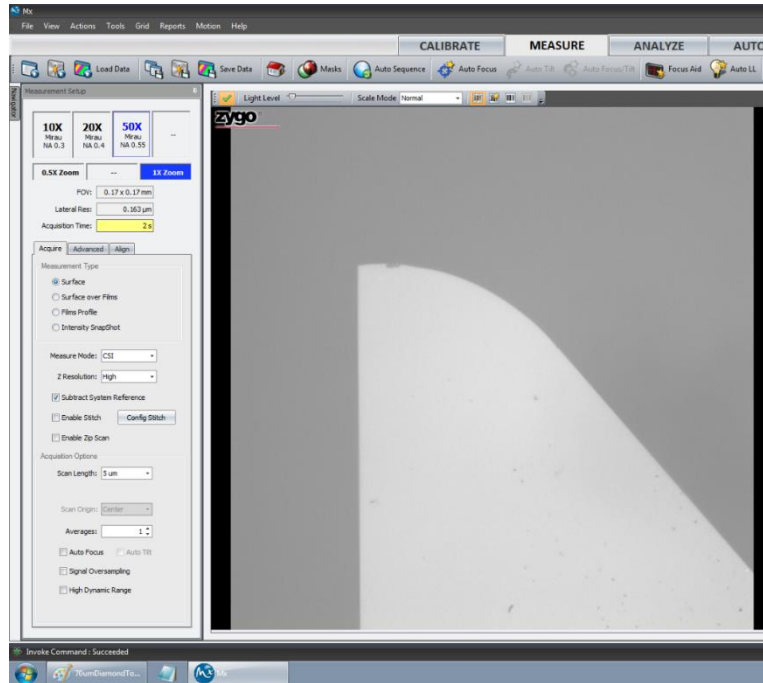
Tool profile of the 70 um half radius diamond tool.
